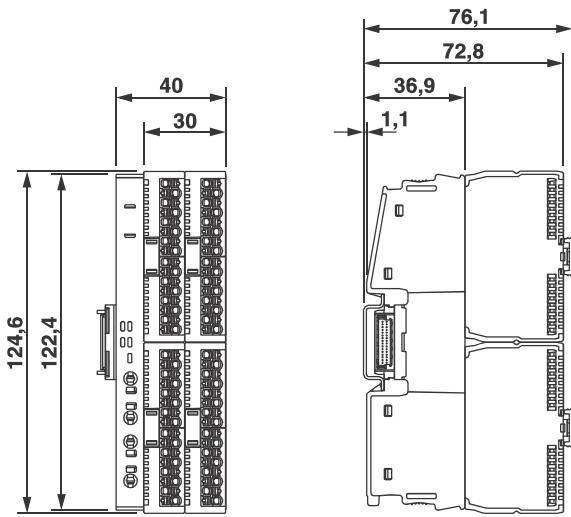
Nominal dimensions of AXL F BP SE4 with inserted Axiline Smart Elements
